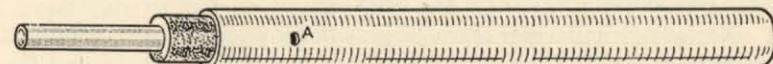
MANDREL FOR MAKING A SPIRAL
